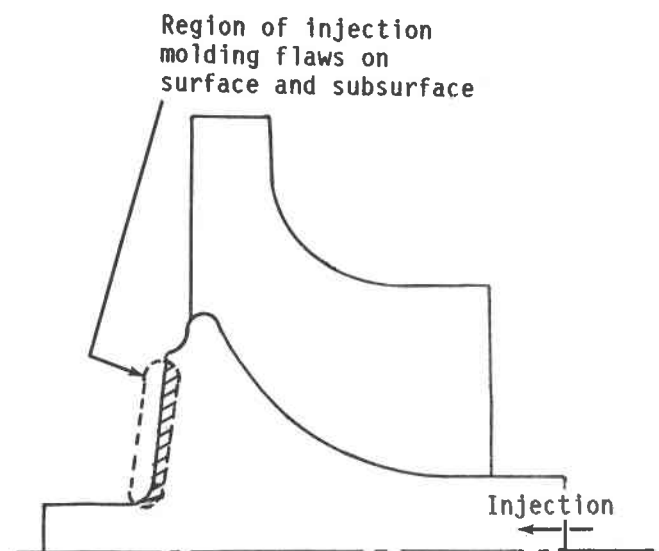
Typical failure (surface flaw) observed in CBO group I gasifier rotors; burst speed of rotor FX34166 was 89,500 rpm.
